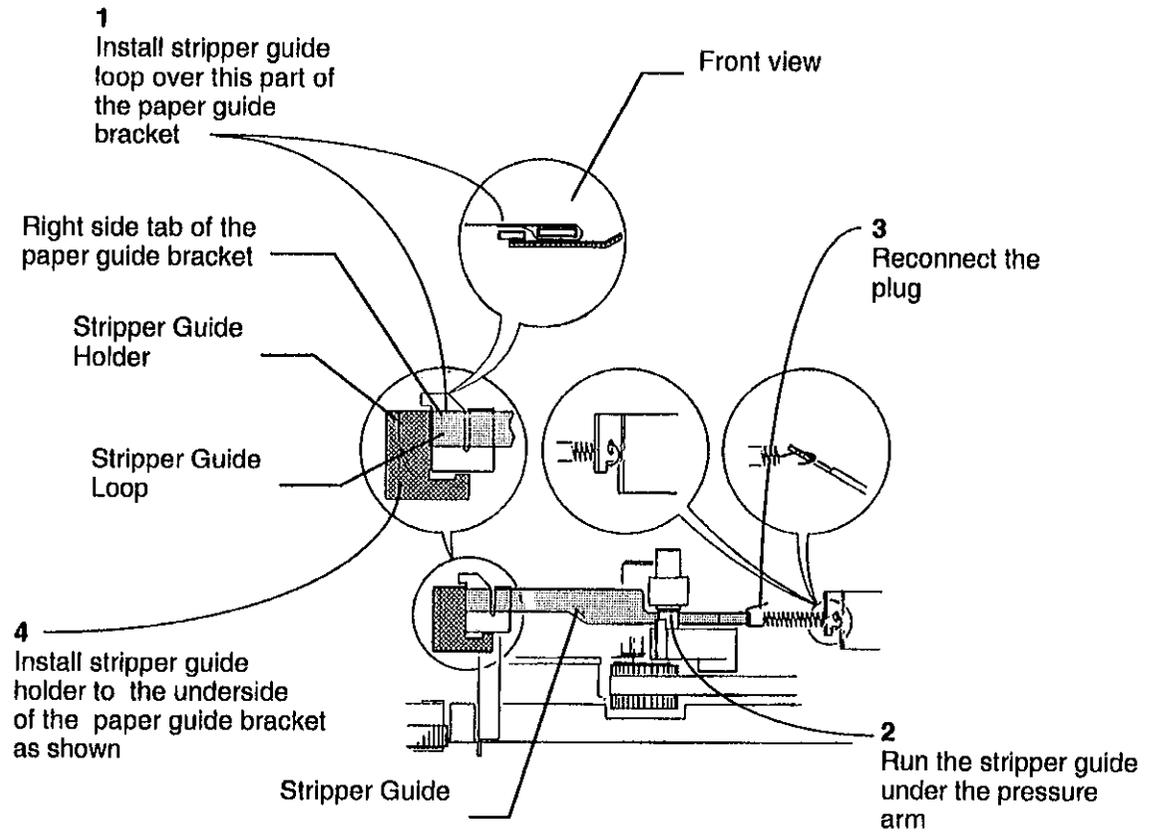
Installing the Stripper Guide and the Stripper Guide Holder
